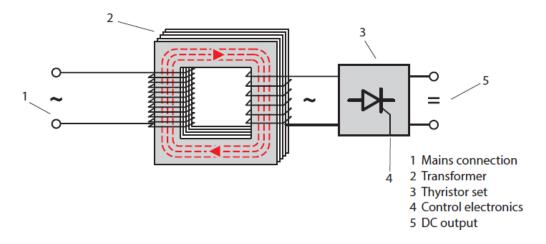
4 - Schematic of an infinitely adjustable welding power source with thyristor.[14]
